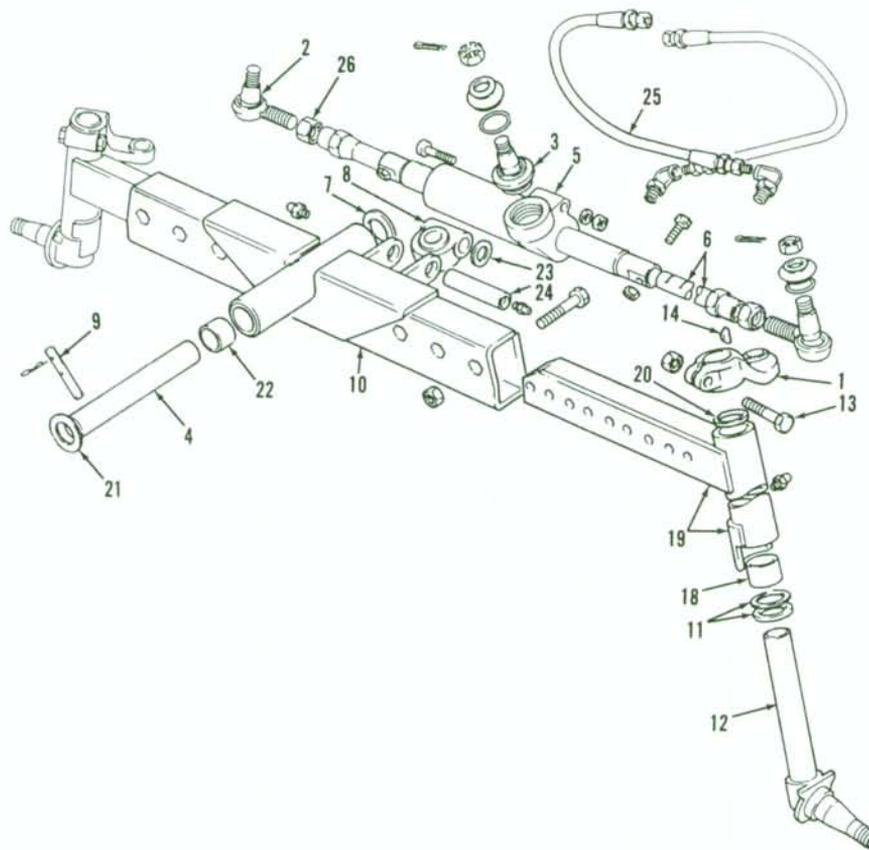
Exploded view of front axle typical of type used on two-wheel-drive 399 models.
